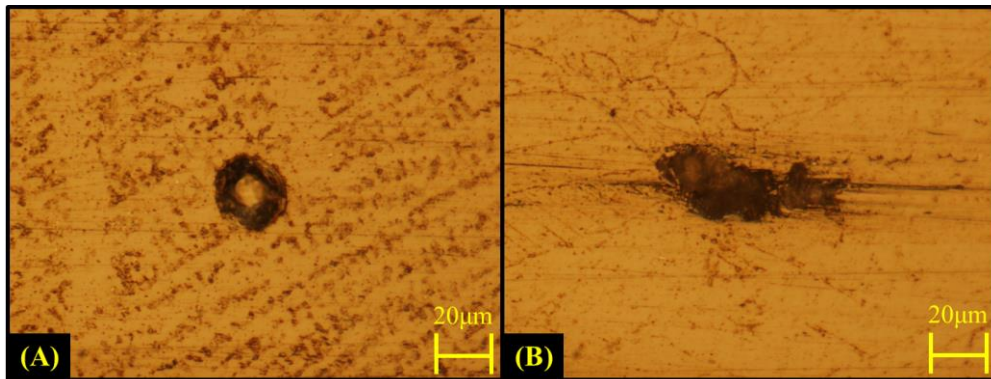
(A) Pore on SLM+HIP+EBW sample 7A/B weld (213.2 J/mm) (B) Defect on SLM+HIP+EBW sample 7A/B base metal (213.2 J/mm)
